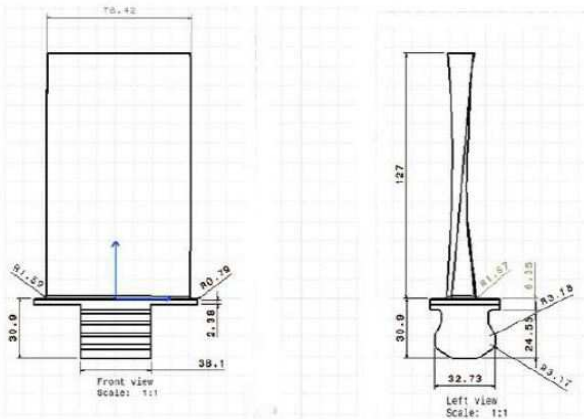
Front View and Side View of Compressor Blade (all dimensions are in mm) [2]
